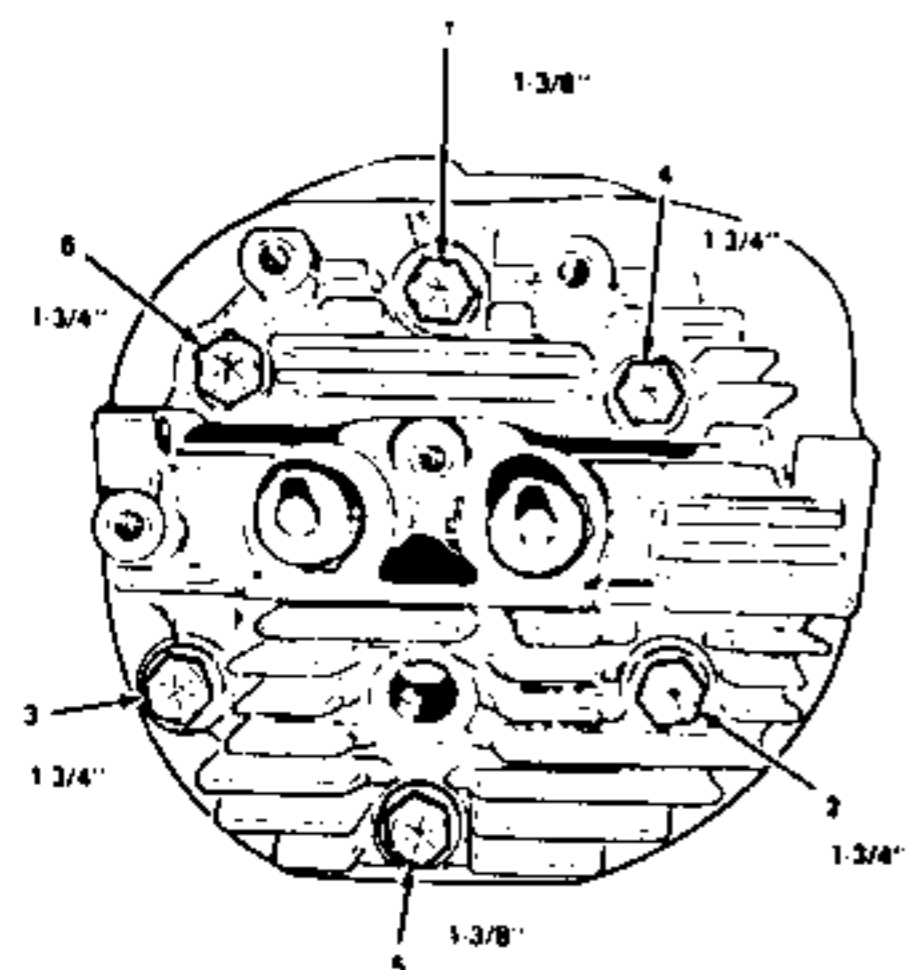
Tighten cylinder head cap screws evenly to a torque of 220 in.-lbs. (24.8 N·m) using tightening sequence shown. Note location of different length cap screws.
